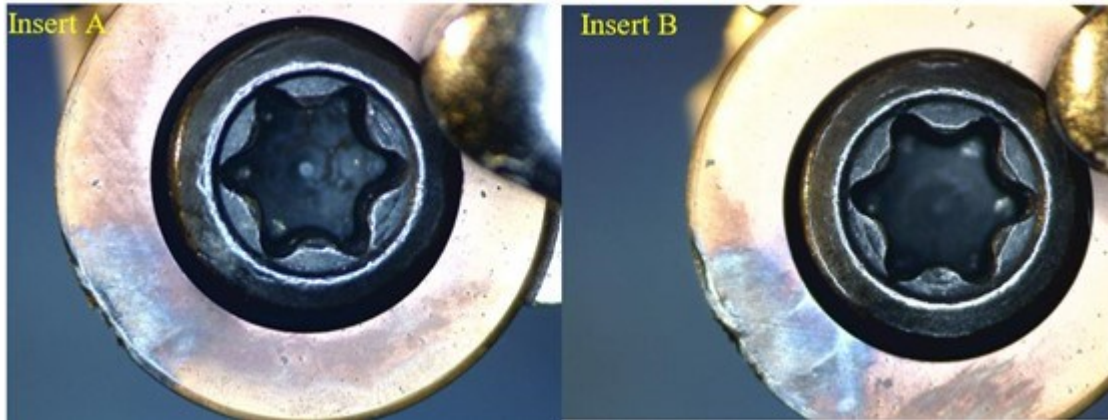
The inserts wear out after milling six layers of the workpiece.
